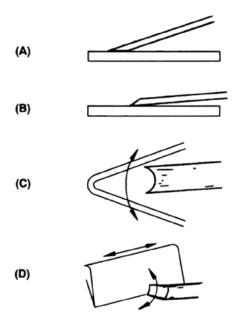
(A) Whetting a chisel's outside bevel, (B) whetting a chisel's inside bevel, (C) whetting a gouge's outside bevel on the inside of a gouge slip, and (D) whetting and honing a gouge's inside bevel.
